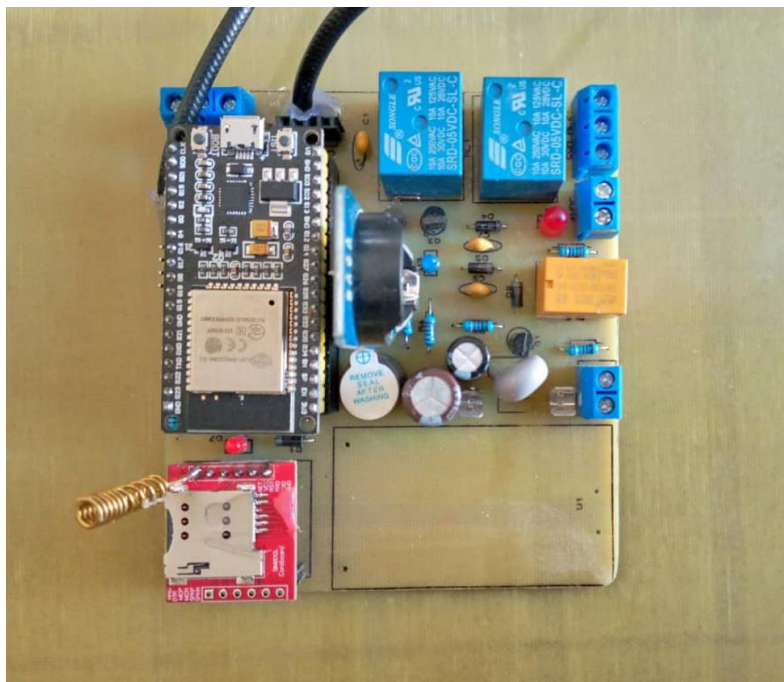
Assembly of the electronic devices after etching and soldering process of control PCB circuit
